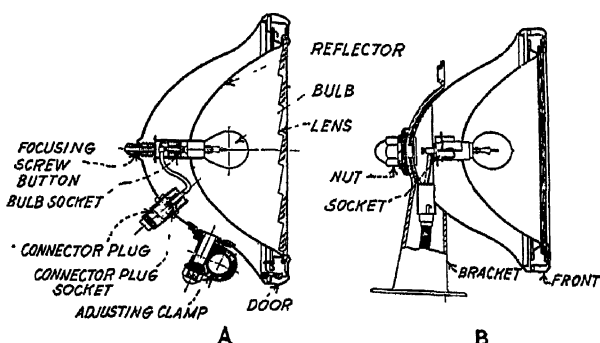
Sectional views of typical adjustable type head lamps (A) With adjustable clamp and external bulb adjustment. (B) With S. A. E. bracket mounting and internal bulb adjustment.
